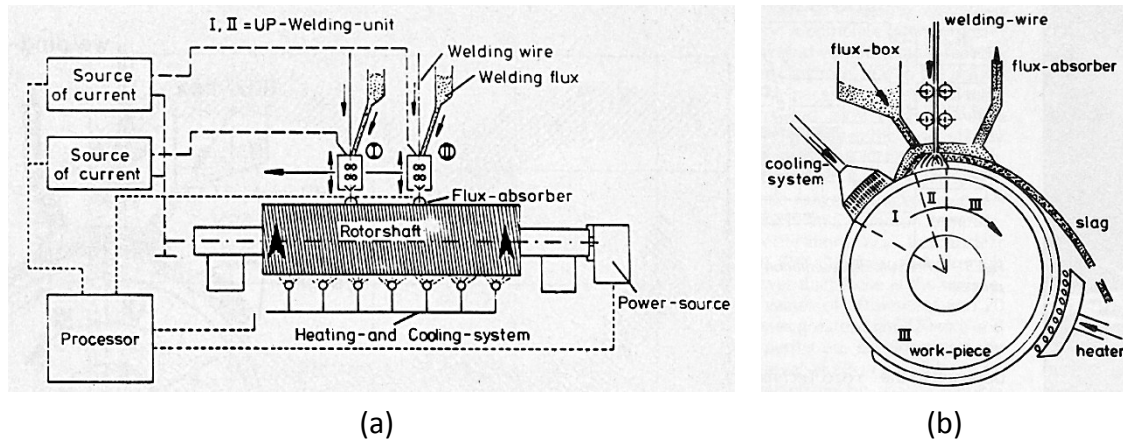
Schematics of a shape welding production machine using the horizontal rolling method showing (a) the process control system, and (b) the tandem submerged arc welding head apparatus (Kußmaul *et al.*, 1983).
